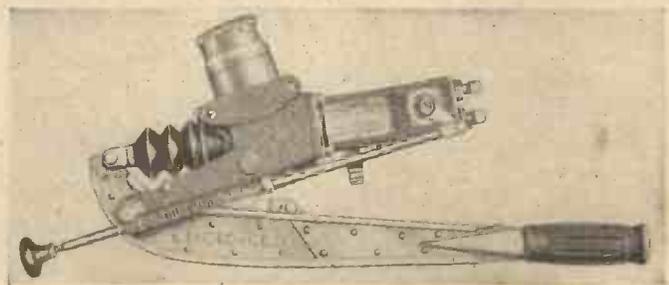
Hand-Pump for Wing Bolt Equipment.
